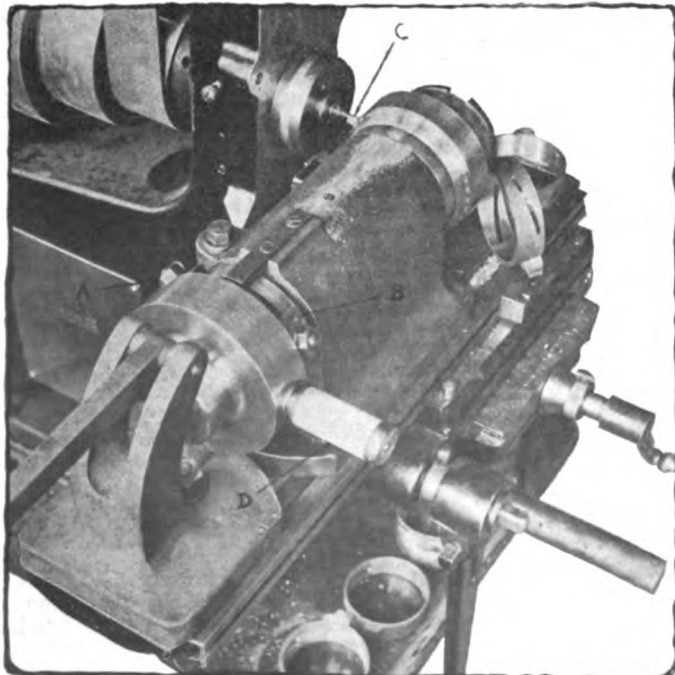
View of slotting tool especially designed for the New-Miller carbureter
